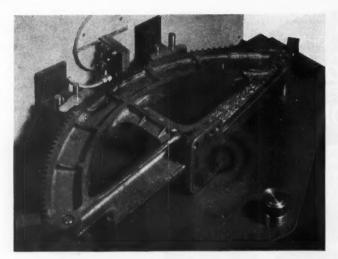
Fixture for Induction Heating and Hardening of Individual Teeth on Large Segment Gear (Courtesy Induction Heating Corporation)
